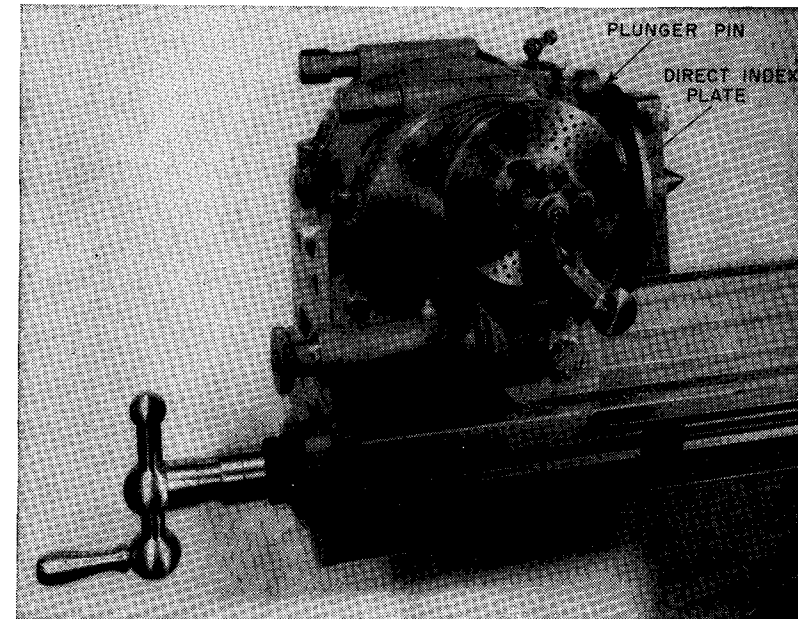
The Brown & Sharpe index head showing the plunger pin and the direct-index plate. (The Brown & Sharpe Manufacturing Company)
